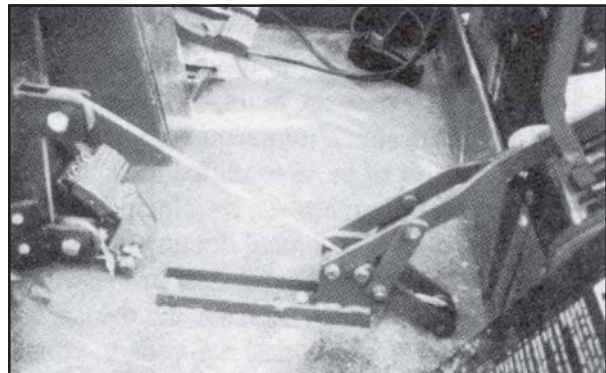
Clutch and brake pedal extensions constructed of tube/flat stock clamped to the pedals.
